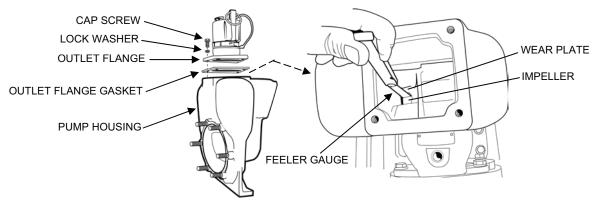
P-7 Pump Impeller Clearance Adjustment.
